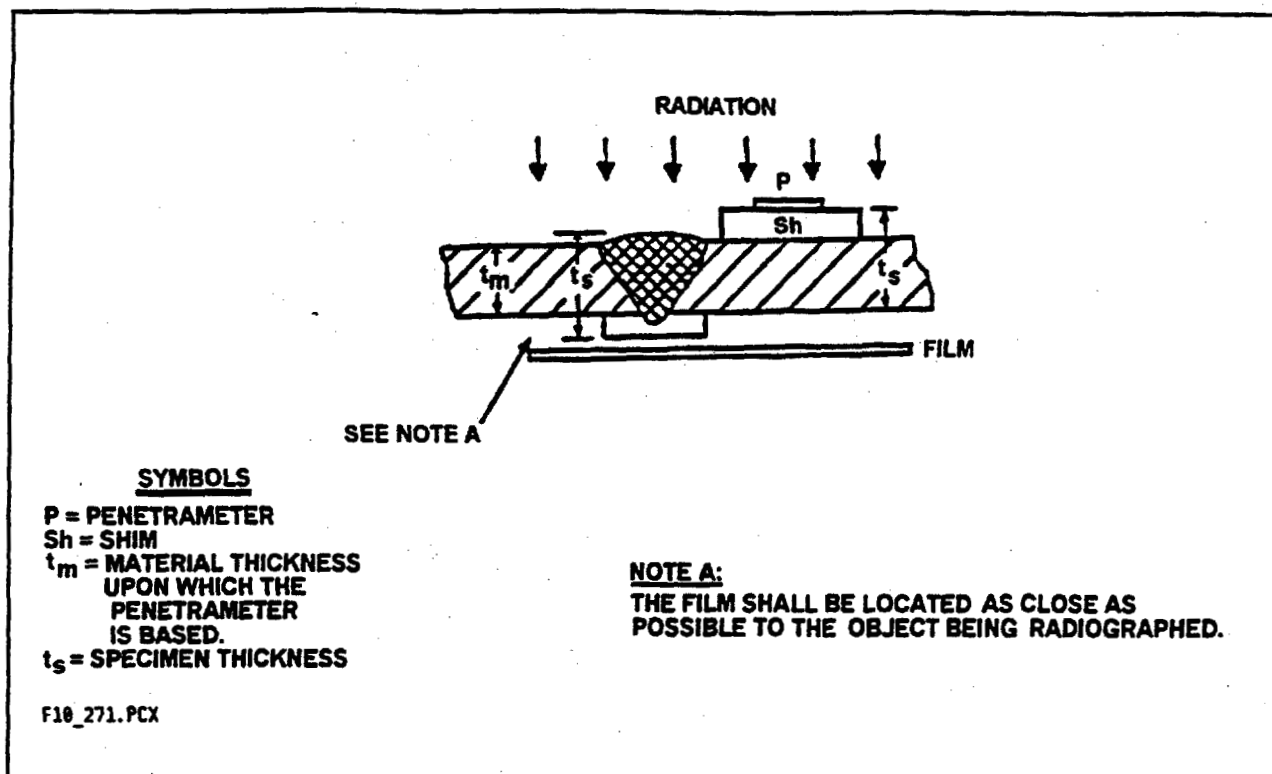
Examples of T_m , T_s , and penetrameter placement: single wall, weld reinforcement, back-up strip.
